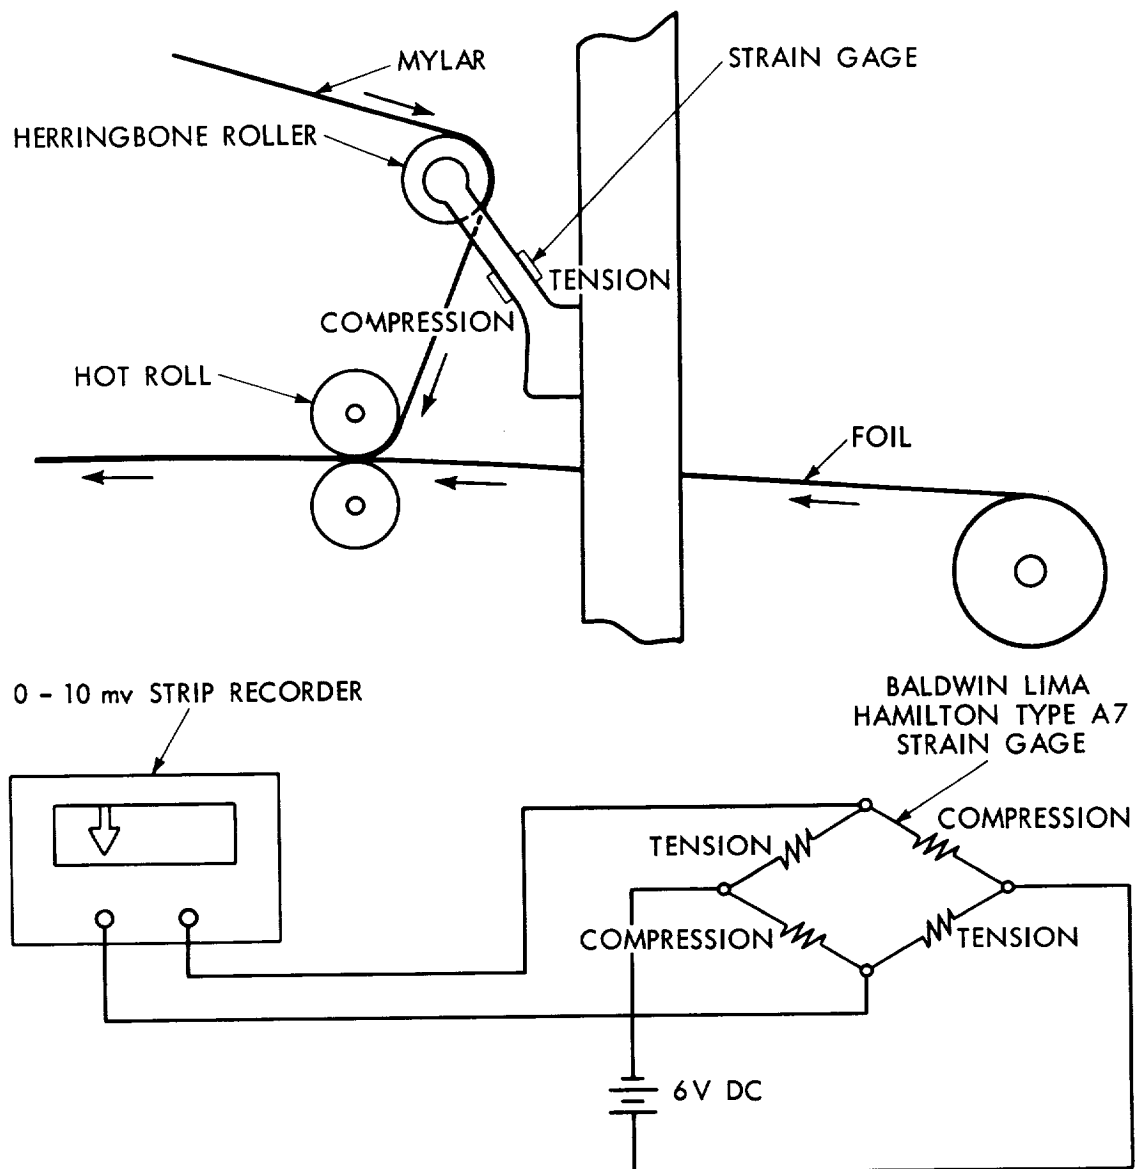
Strain Gage Assembly for Herringbone Roller Brake
